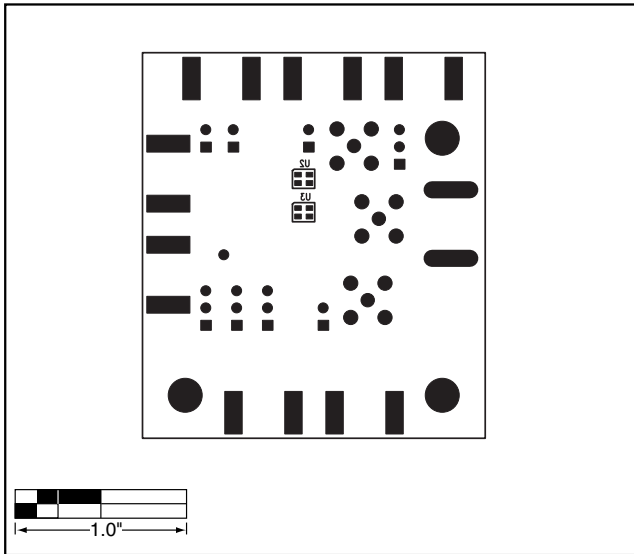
MAX2385/MAX2386 EV Kit Component Placement Guide—Solder Side
